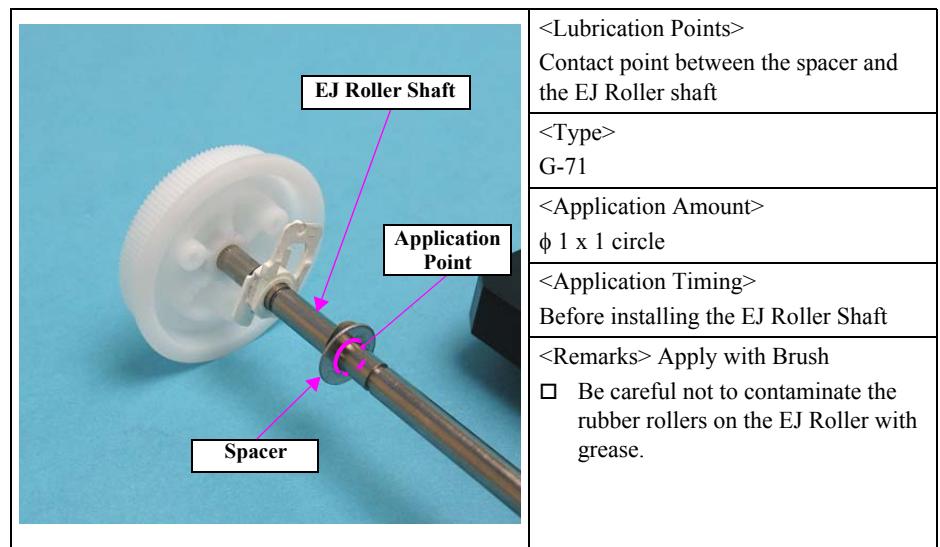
Lubrication of the EJ Roller Shaft (1)
